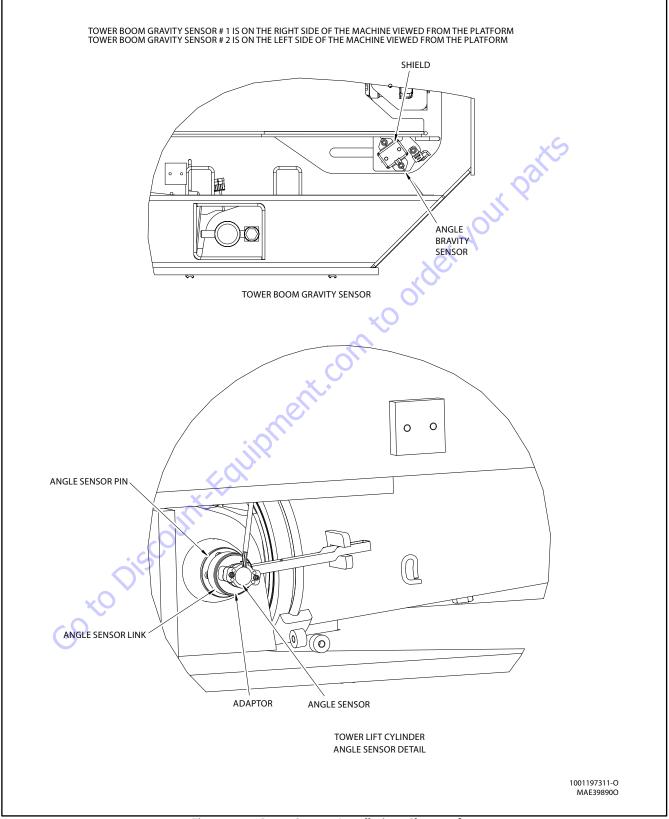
Boom Sensors Installation - Sheet 6 of 13
